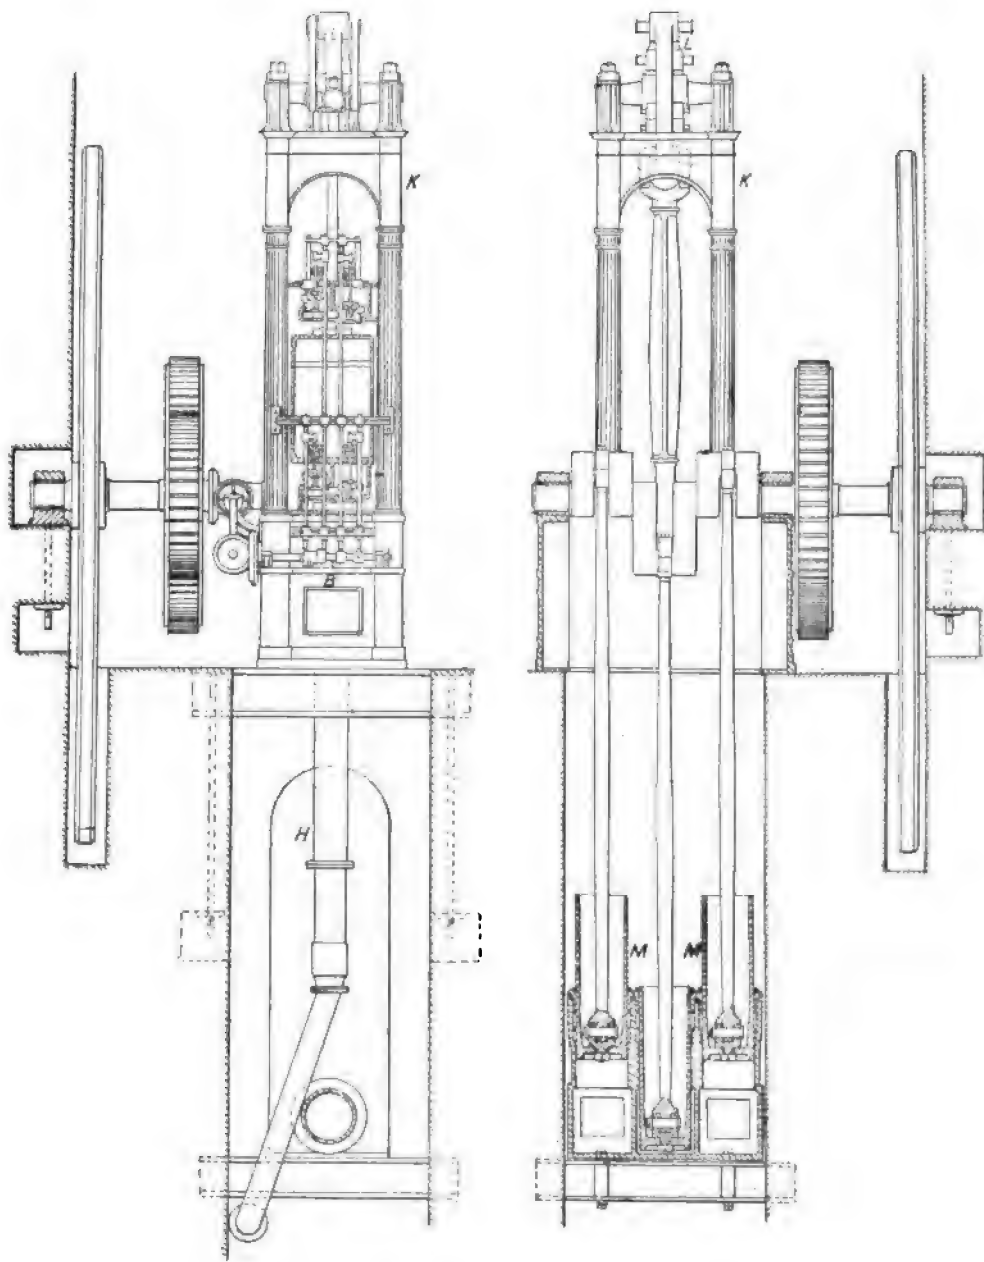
Beam Engine. (End Elevations and Sections.)
